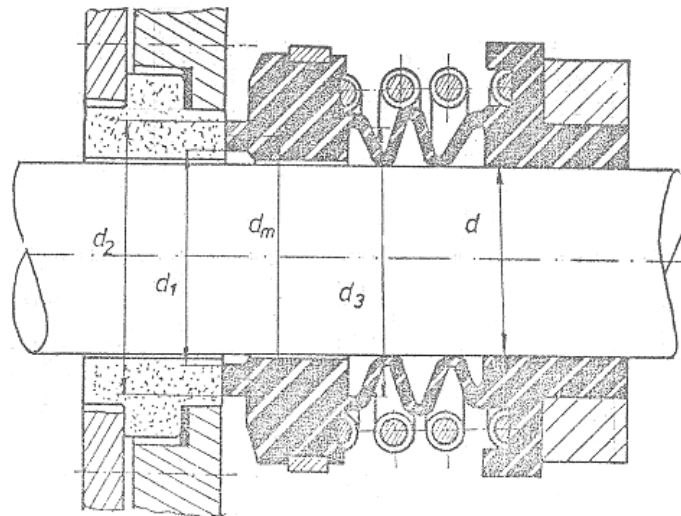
Frontal mechanical seal with rubber bellows [2]
